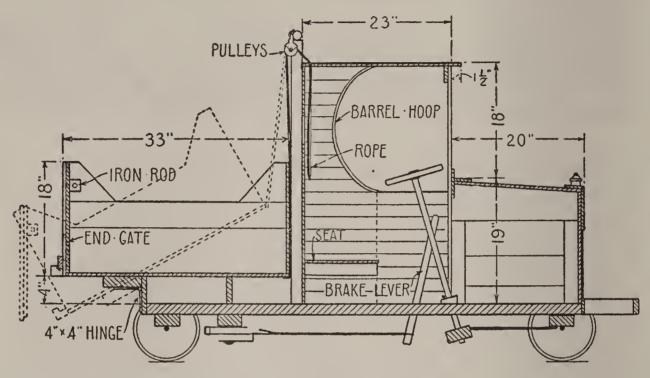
Side Elevation of Dump-Truck Pushmobile Shown in Photograph of Fig. 571.
